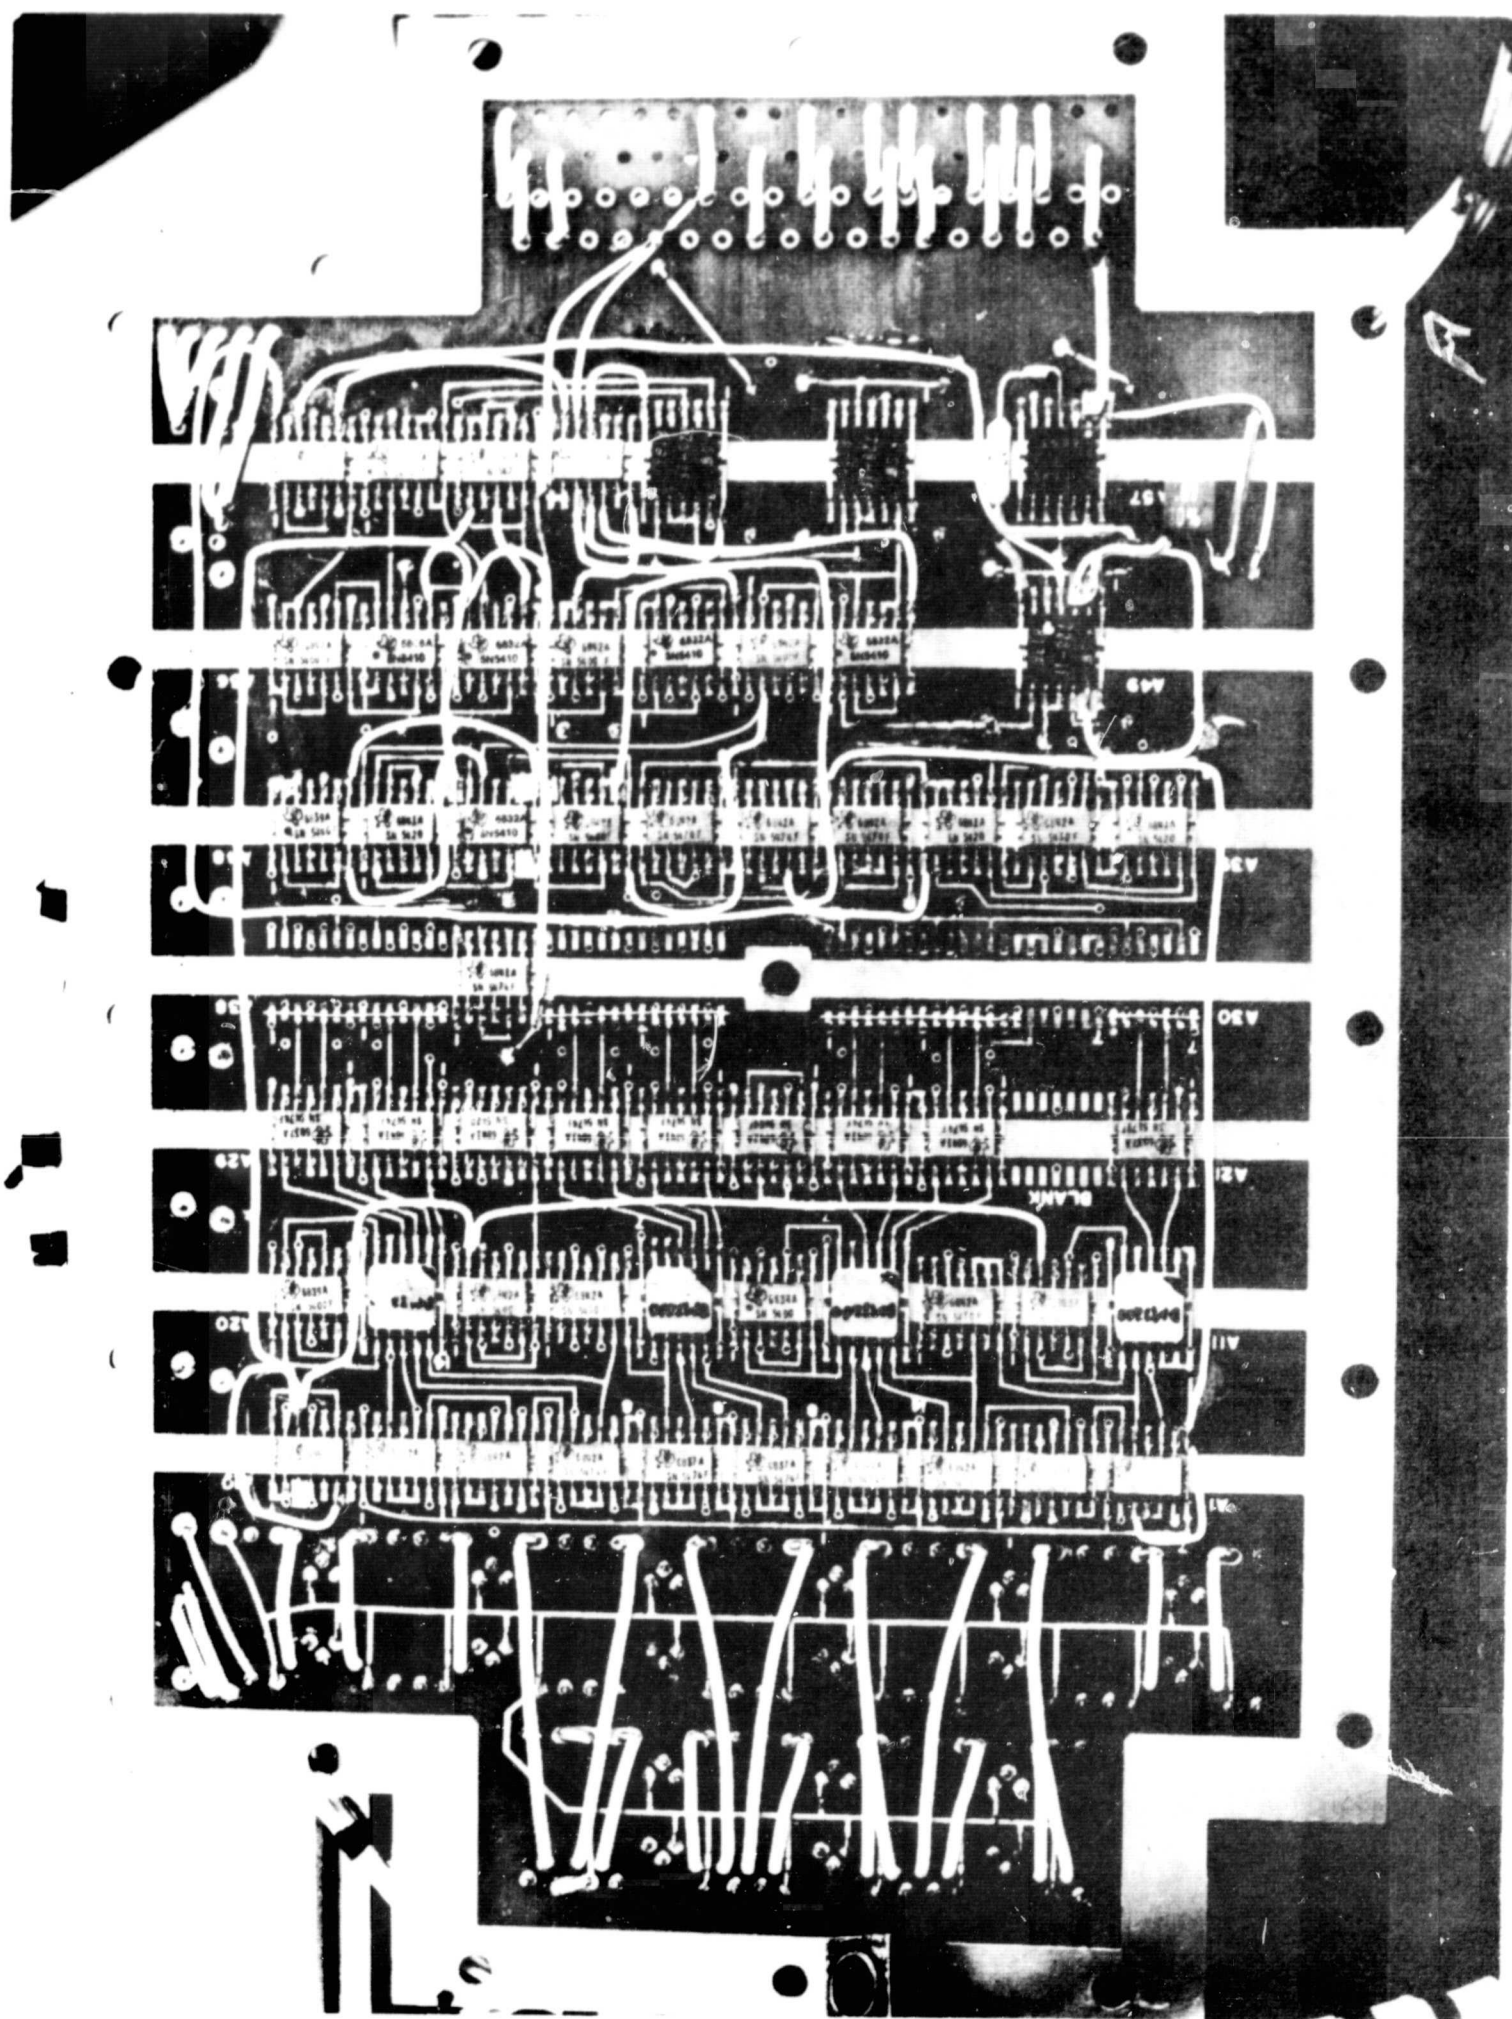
MULTILAYER PRINTED CIRCUIT BOARD, COMPONENT SIDE
